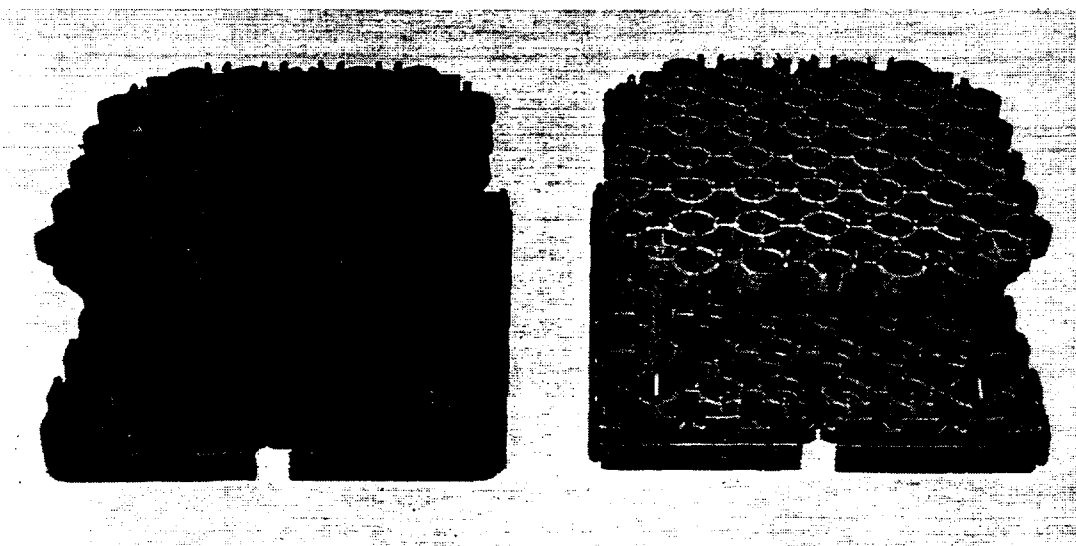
Photograph of sand-cast trays and fixtures of IC-221M for continuous pusher carburizing furnaces.
